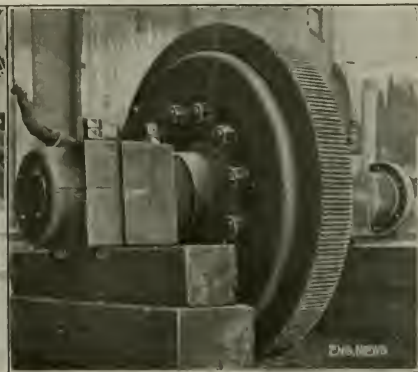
MILLING CUTTER USED IN HOT-SAW MACHINE
